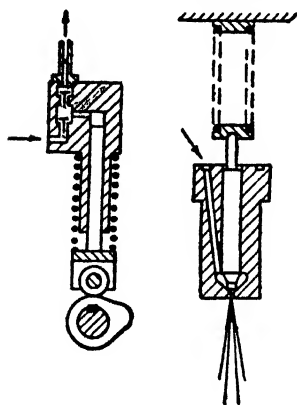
(Left) The Fuel Pump and (right) the Injection Nozzle Principle.
